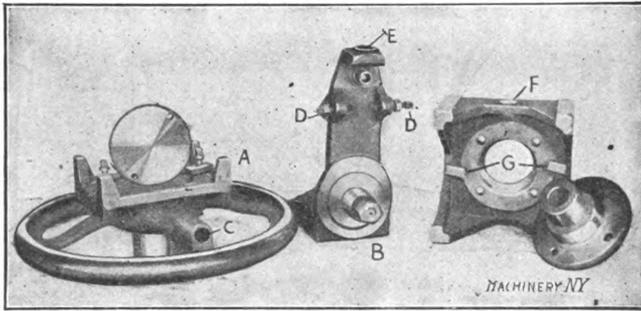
Jigs for Drilling Parts of Device shown in Fig. 13
